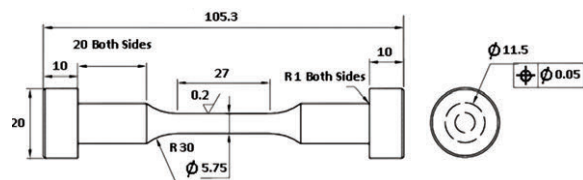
Dimensions (mm) of the standard fatigue test specimen according to ASTM E606 [8]
